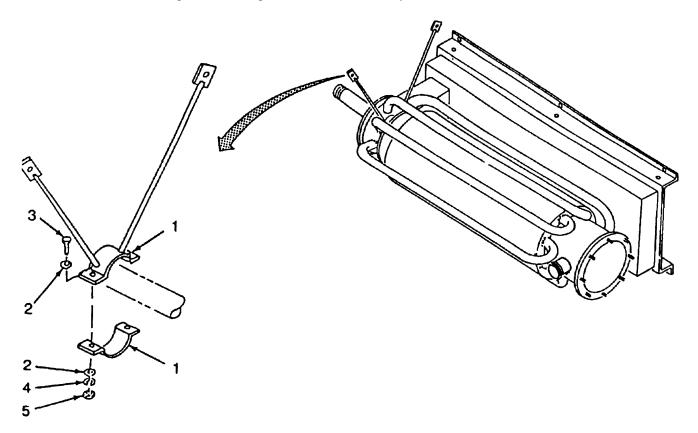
Heat Exchanger, (Model H120-1) Assembly
